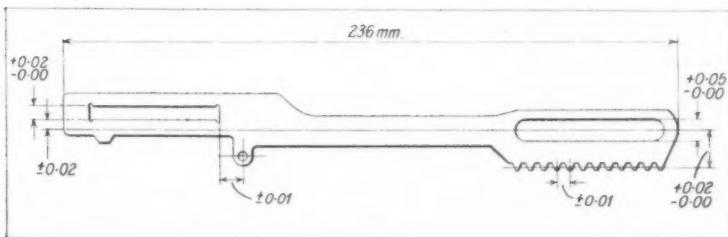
Details of the Rack Component in Fig. 1 are Here Shown. All Dimensions are Given in Millimetres
